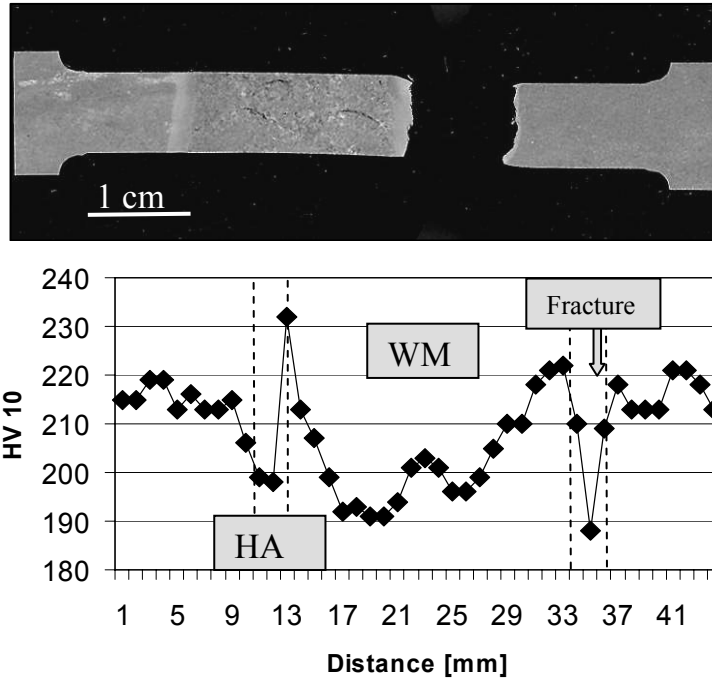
Macrograph and cross-weld hardness profile of the plate weld after the creep test 600°C / 60 MPa / 19 210 hrs.
